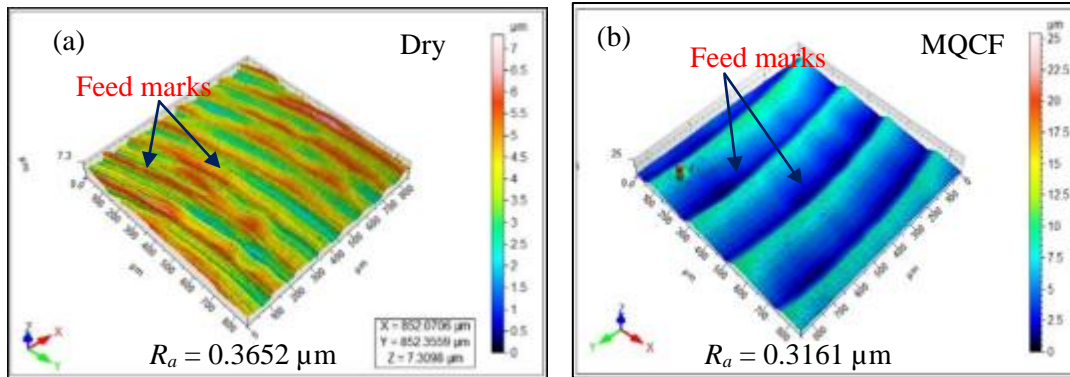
3D surface profile of workpiece with MQCF and dry machining, respectively at spindle speed of 355 rpm, feed rate of 80 mm/min and depth of cut of 0.15 mm.
